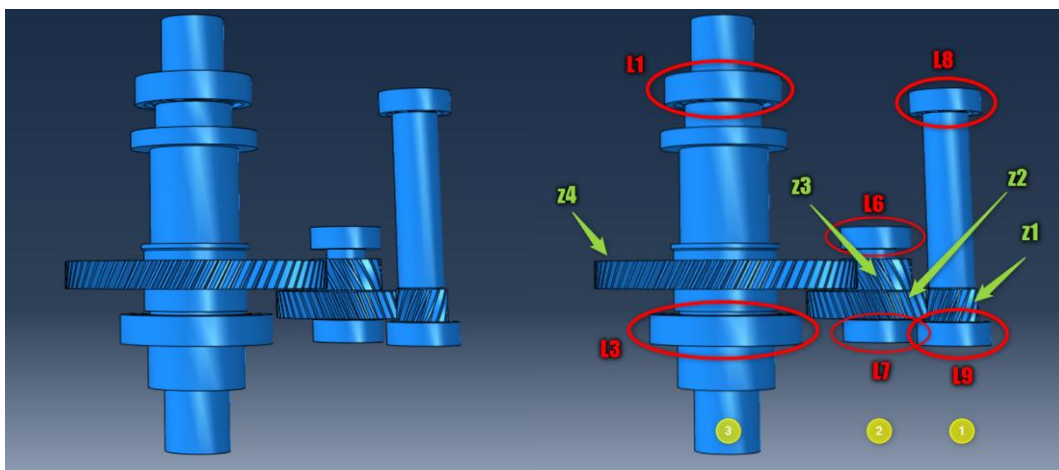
Shafts and gearing configuration inside the DU (shafts in yellow, gearing in green and bearings in red)
